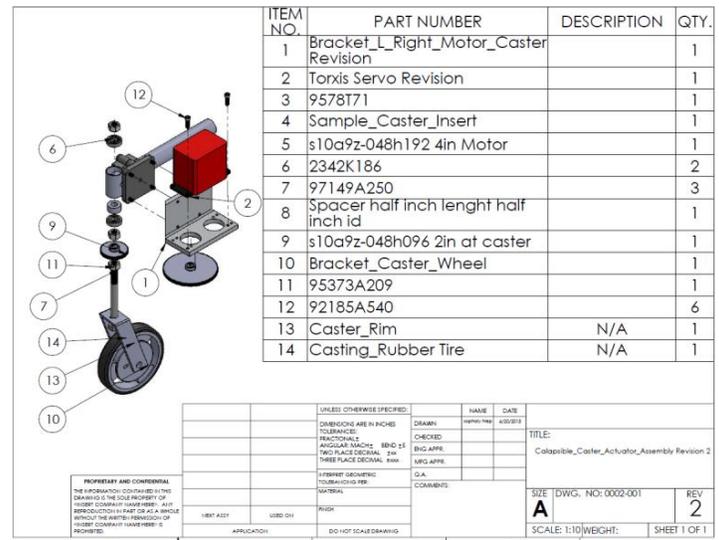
Third Iteration Caster Assembly Exploded View [30]
